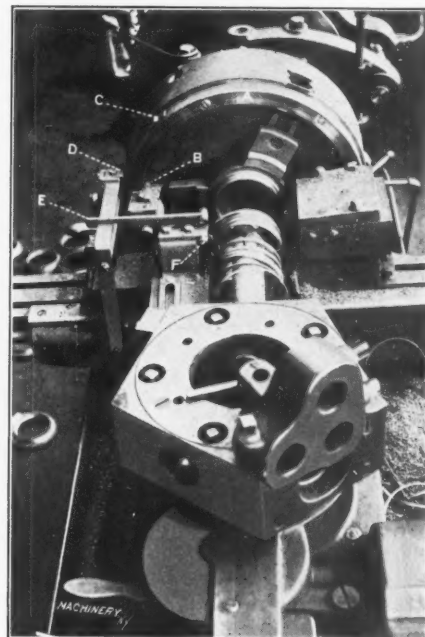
Machine for Boring the Inside and Outside of Eccentric Rings simultaneously
